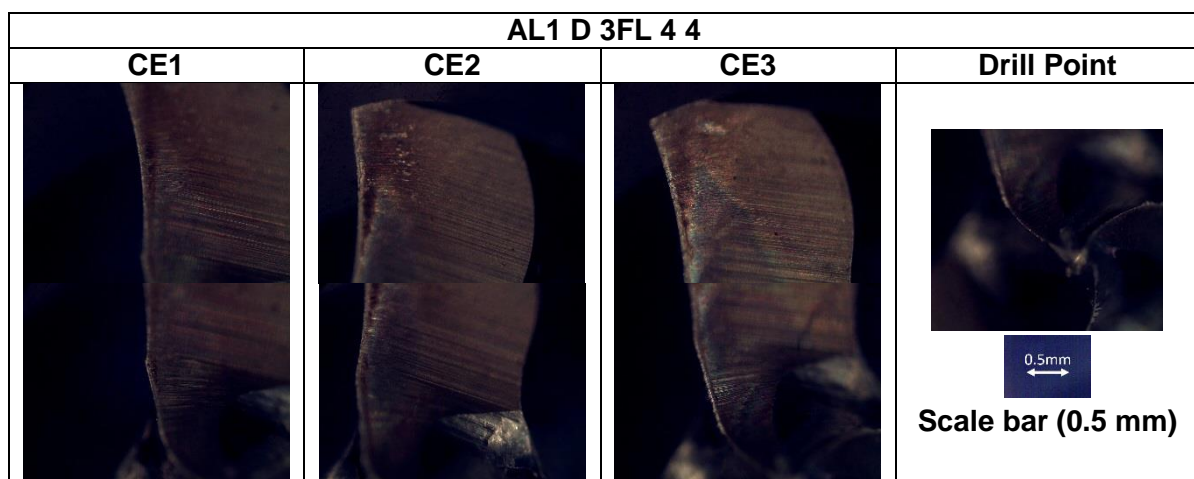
Signs of smearing on the relief angle of the drill in machining of 6082-T6
